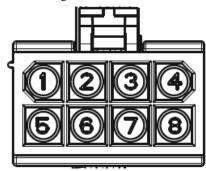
Front View of Power Wire Harness Pin Layout $^{\rm A230457}$
